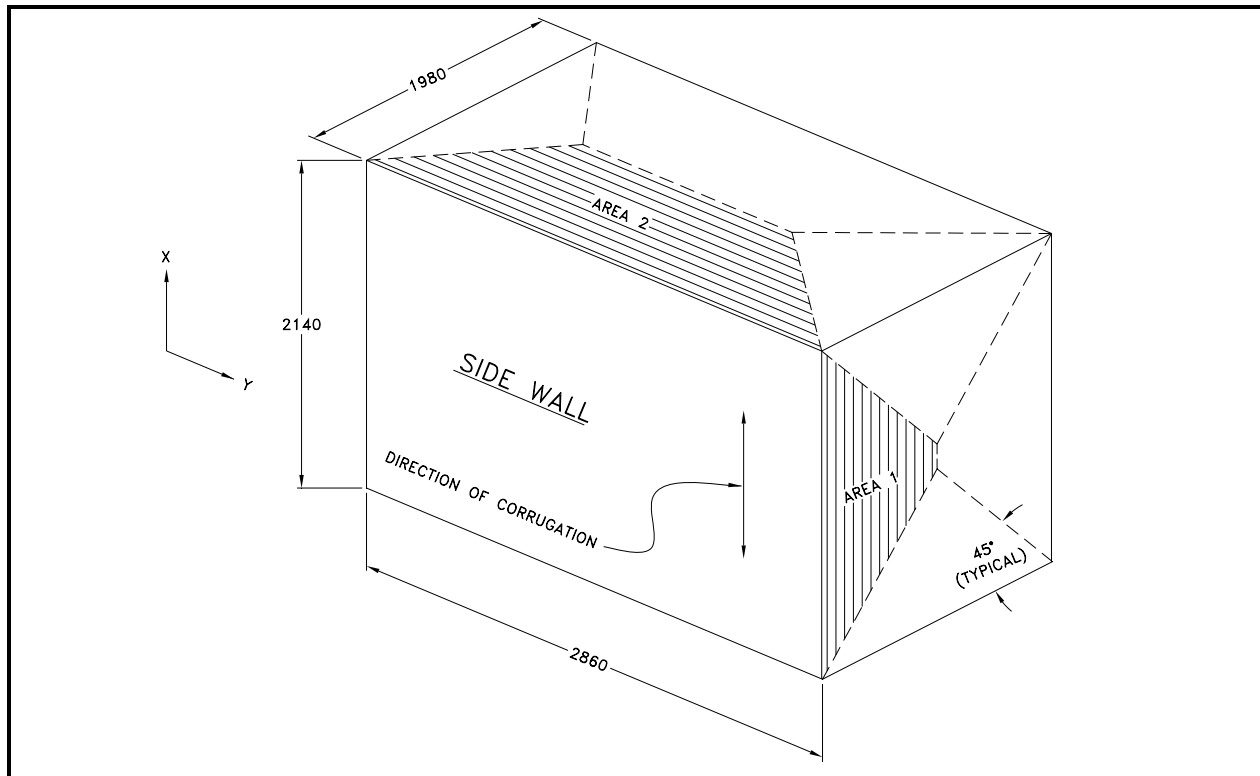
(a) – View of Side Walls and Adjacent Walls, Showing Areas Used to Calculate Edge Loads for Side Walls
